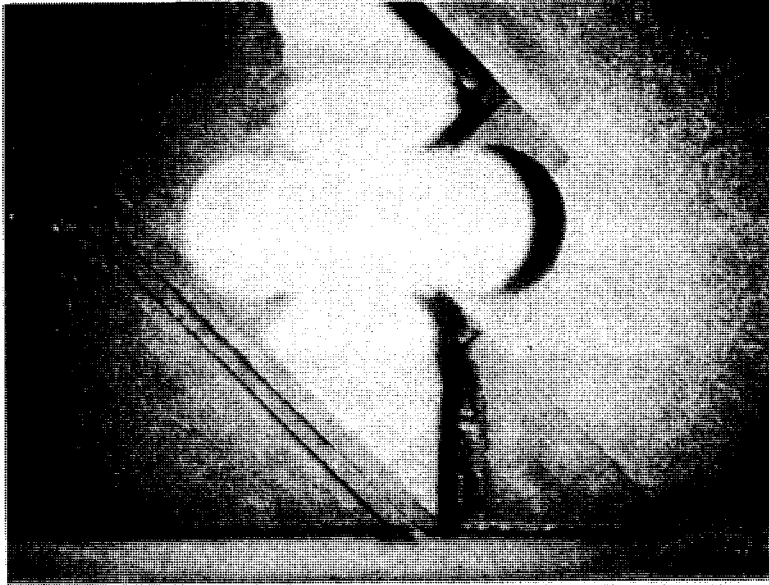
H6-C-27 tensile tested at .004 mm/s head rate (29.7 KN strength). Note uniform and even fracture surface except for 45° ply which did not fracture {X 3.5}
